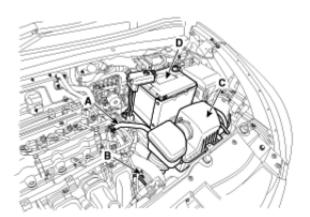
Identifying Breather Hose, Air Intake Hose And Air Cleaner Assembly Courtesy of HYUNDAI MOTOR CO.
